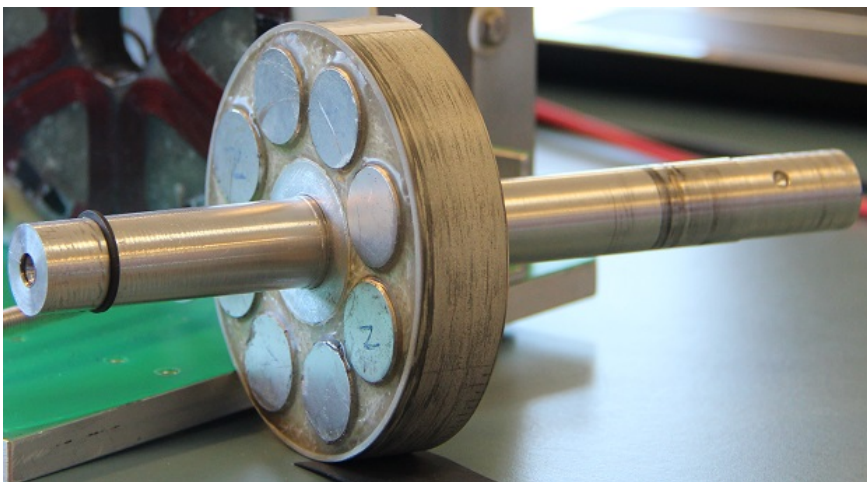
The complete rotor assembly. The rotor is pressed on an aluminium shaft.
